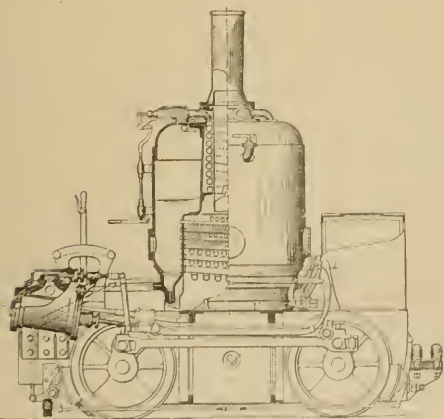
SINGLE BOILER ROWAN MOTOR.
